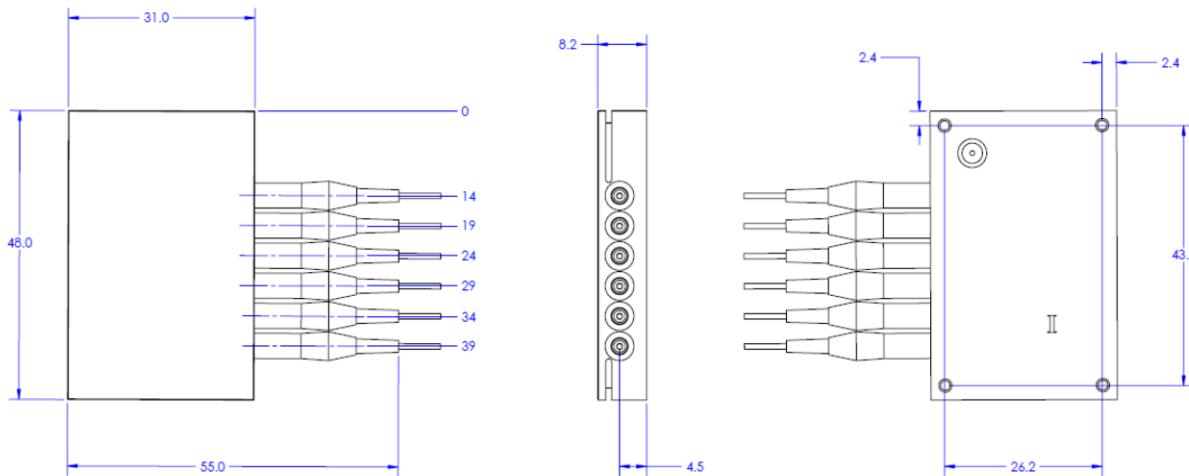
, Mechanical Drawing of 90deg Optical Hybrid
